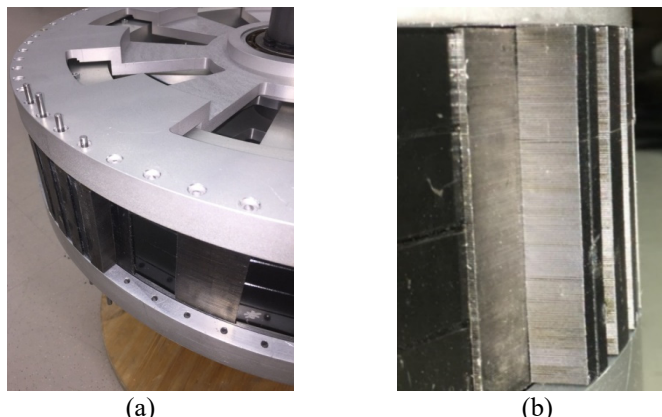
(a) Low-speed cage rotor assembly and (b) deflection of a cage rotor laminated segment.
